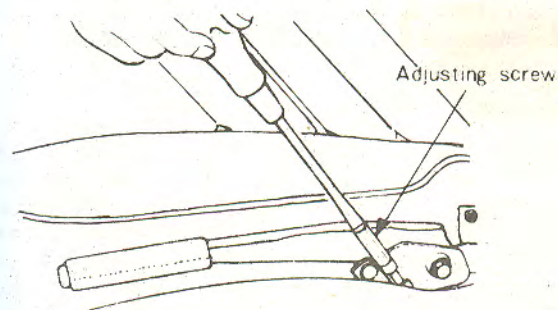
Adjusting the handbrake cable. The adjusting screw located next to the handbrake lever in the car interior.
